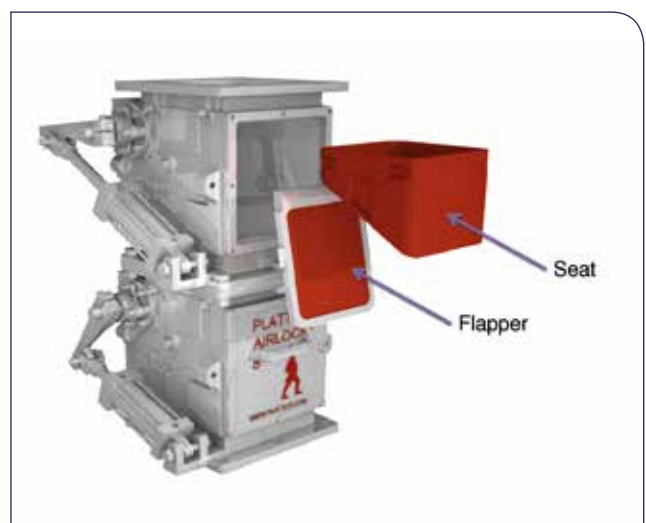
Double flap valves feature front access covers, which makes it possible to remove and replace or recondition internal wear parts such as seats and flappers. (© Plattco Corporation.)
